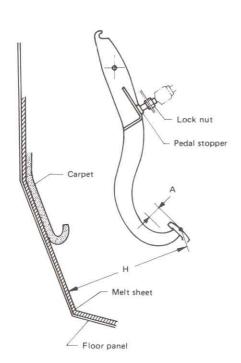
Clutch pedal adjustment (Sec 3)
